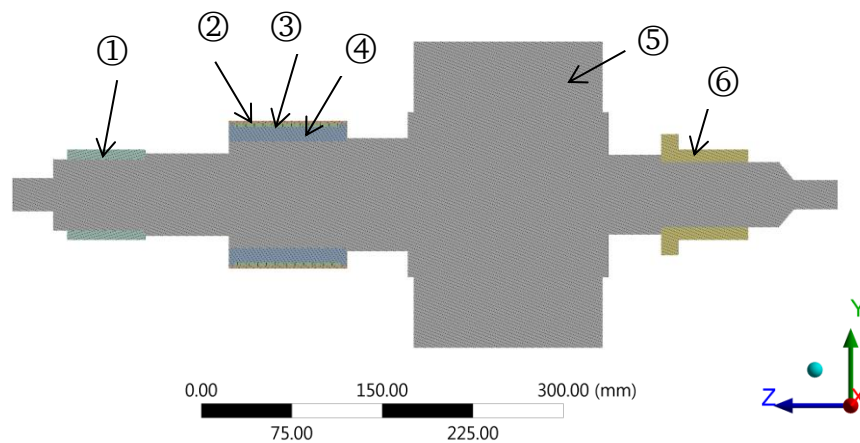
Rotor components modeled in *ANSYS* for modal analysis (1-Radial MB rotor, 2-E-machine bandage, 3-E-machine magnets, 4-E-machine rotor iron, 5-Flywheel body & shaft, 6-Combined MB rotor)
